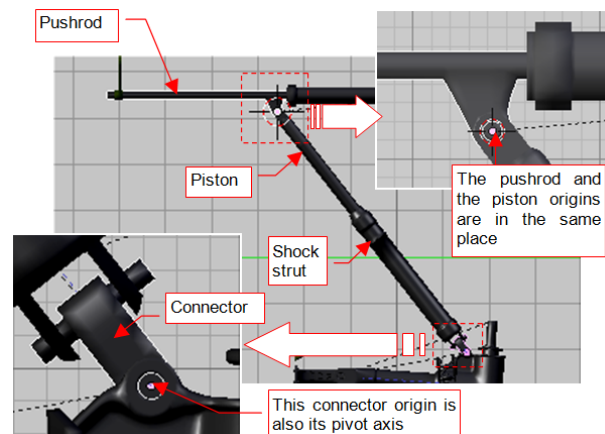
ORIGINS OF THE TAIL WHEEL ASSEMBLY ELEMENTS
